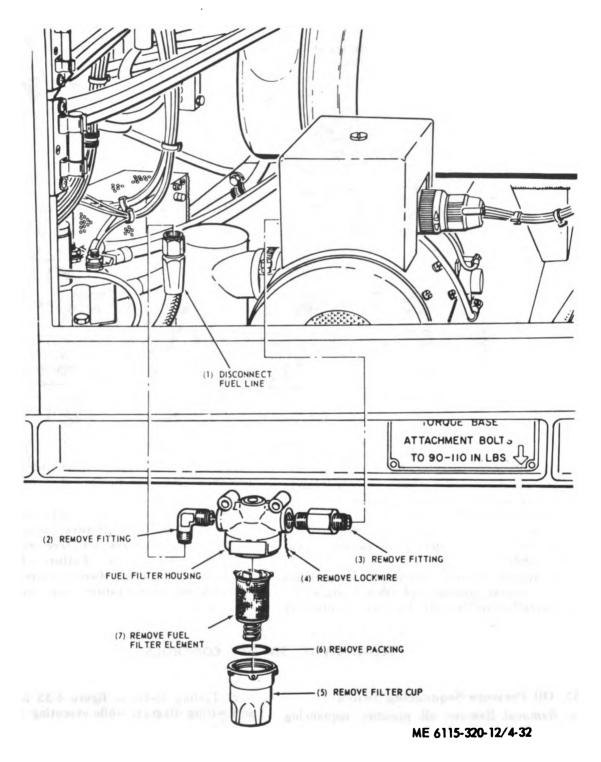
Heater fuel filter assembly, removal, service, and installation.
